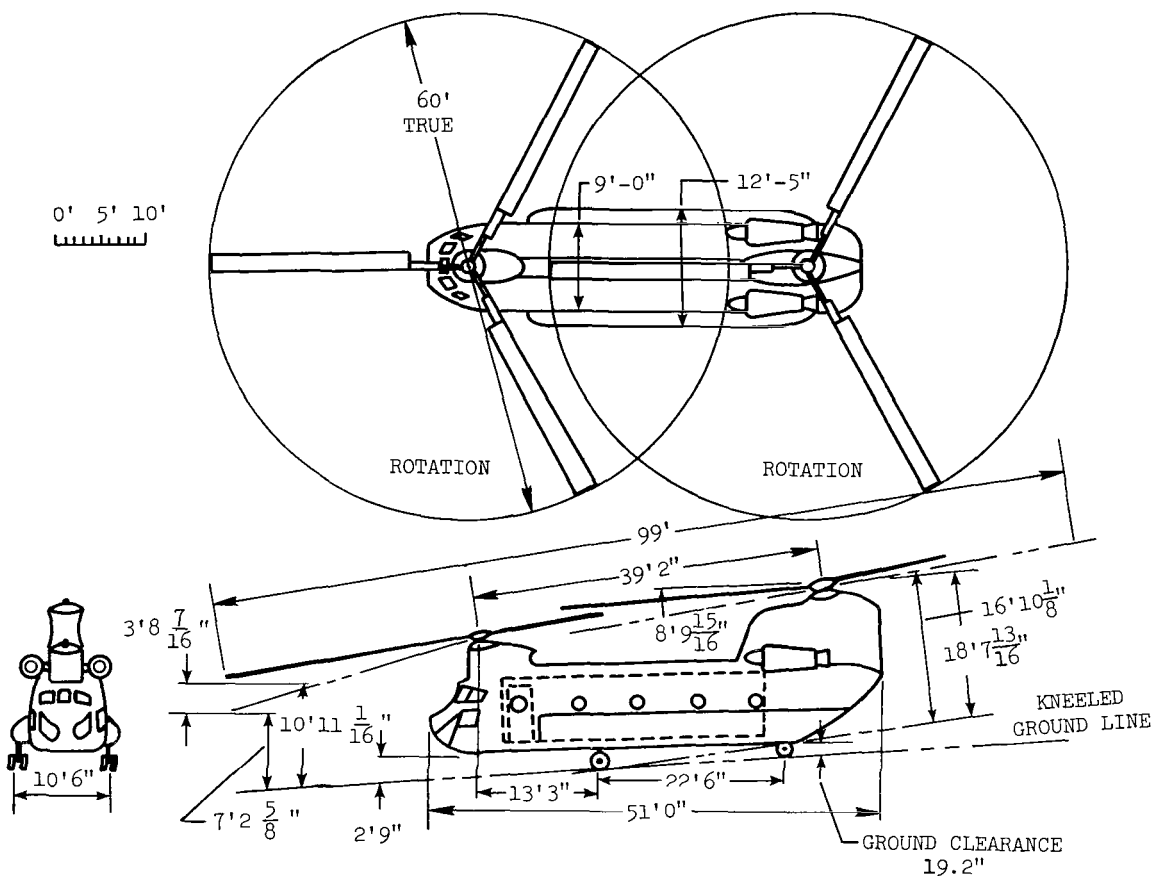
Three-view drawing of the CH-47C helicopter taken from reference 6 (1 ft = 0.3048 m; 1 in. = 0.0254 m).
